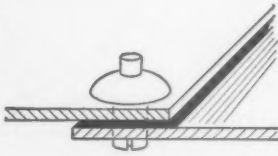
Inserted in hole, Southco Rivets are quickly set by driving pin with hammer. No special tools are required. Bucking is not necessary.
